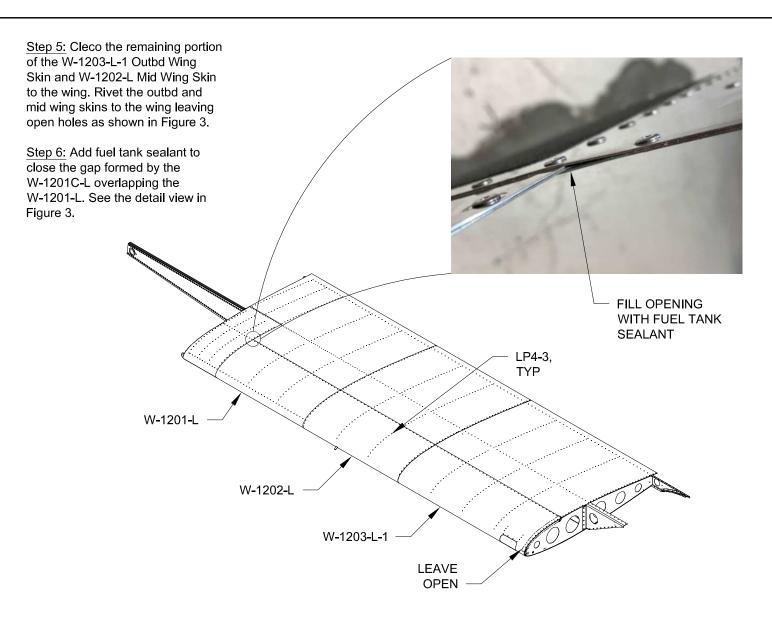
RIVETING MID AND OUTBOARD WING SKINS
